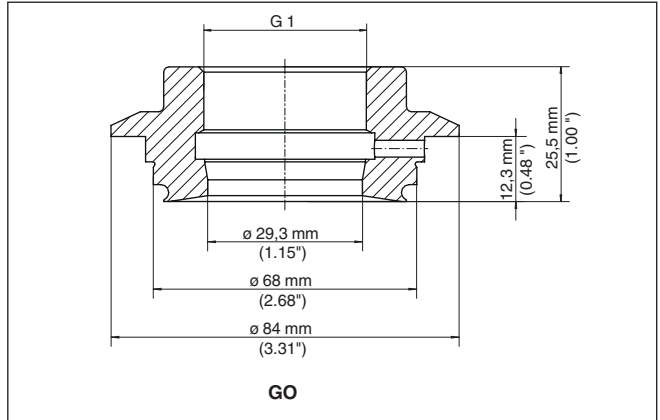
Dimensions of threaded adapter G1 (DIN 3852-X) on Varivent Form N 50-40
